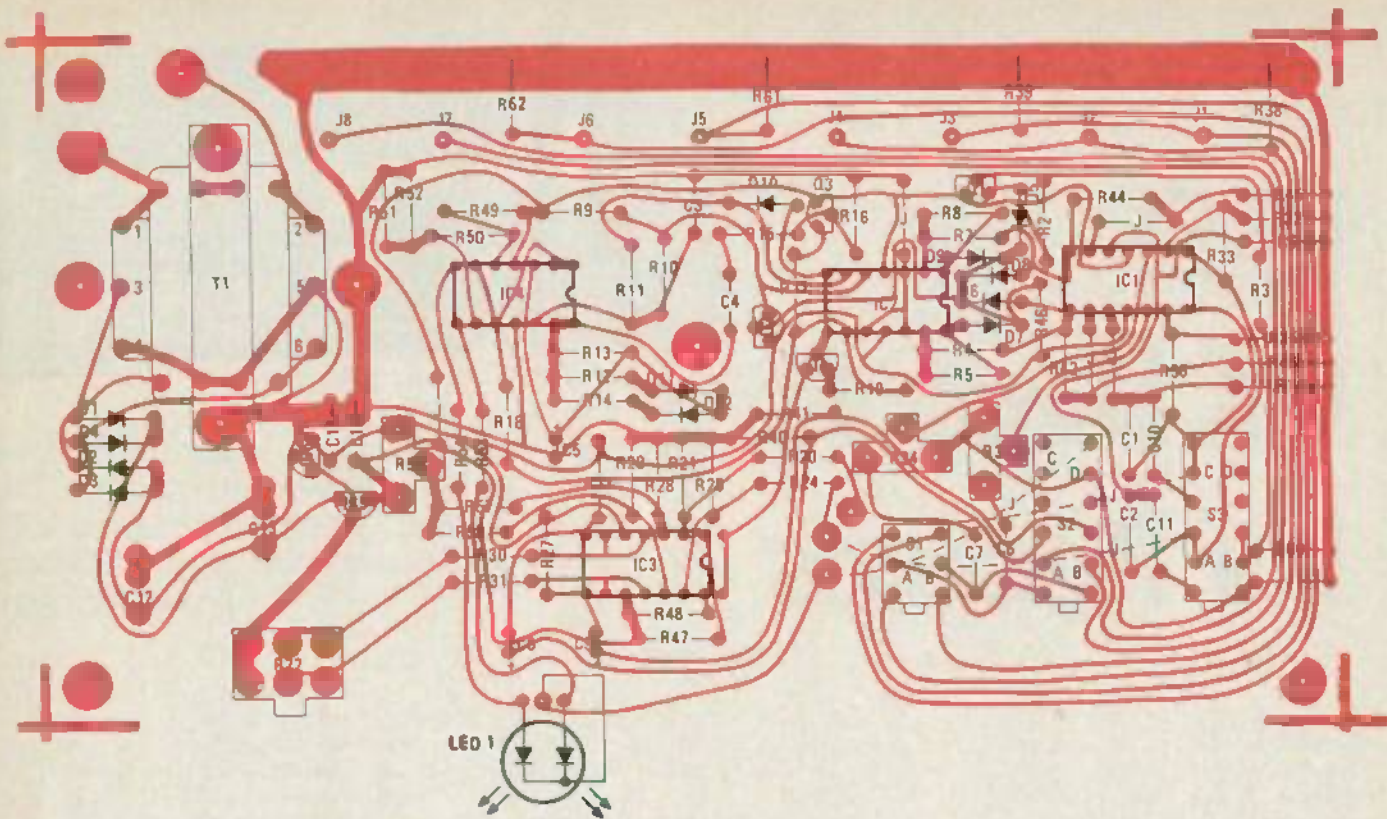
PARTS-PLACEMENT DIAGRAM for the CX expander. The three long jumpers in the lower right-hand corner of the board go on the foil side, and are installed last.
